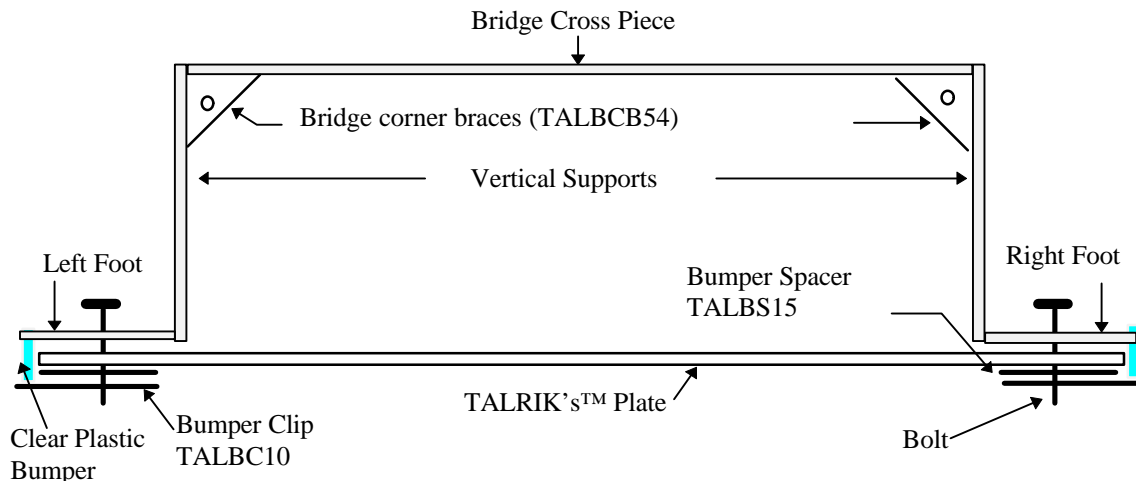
Bridge assembly. The overhang of the bridge feet and the bumper clips, hold the clear plastic bumper ring in place.
